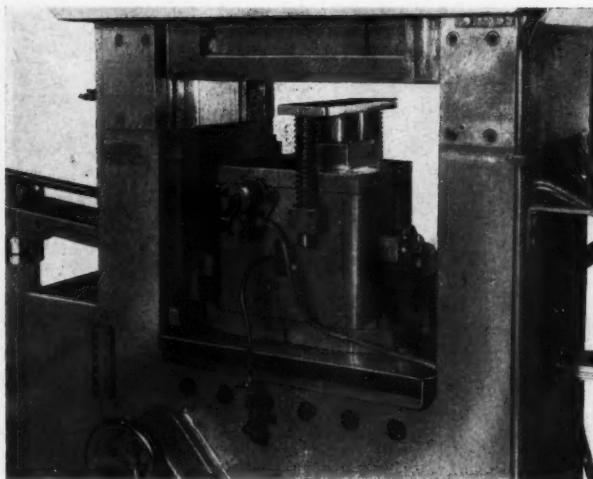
Close-up view of the tool on the Colforg cropping machine
